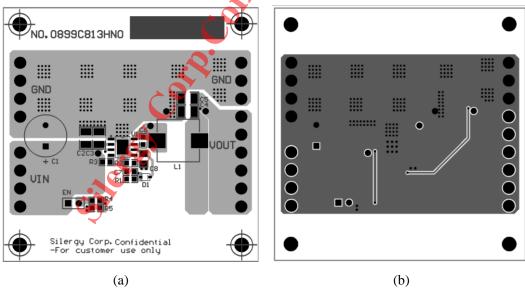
PCB Layout Plots: (a) top layer, (b) bottom layer
